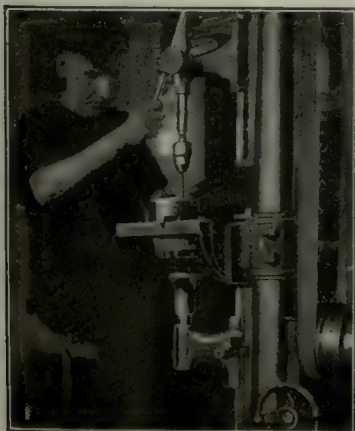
DRILLING THROUGH A JIG. FIG. 2—ACCURATE SPACING OF HOLES. FIG. 3—FINISHING SPINDLES
